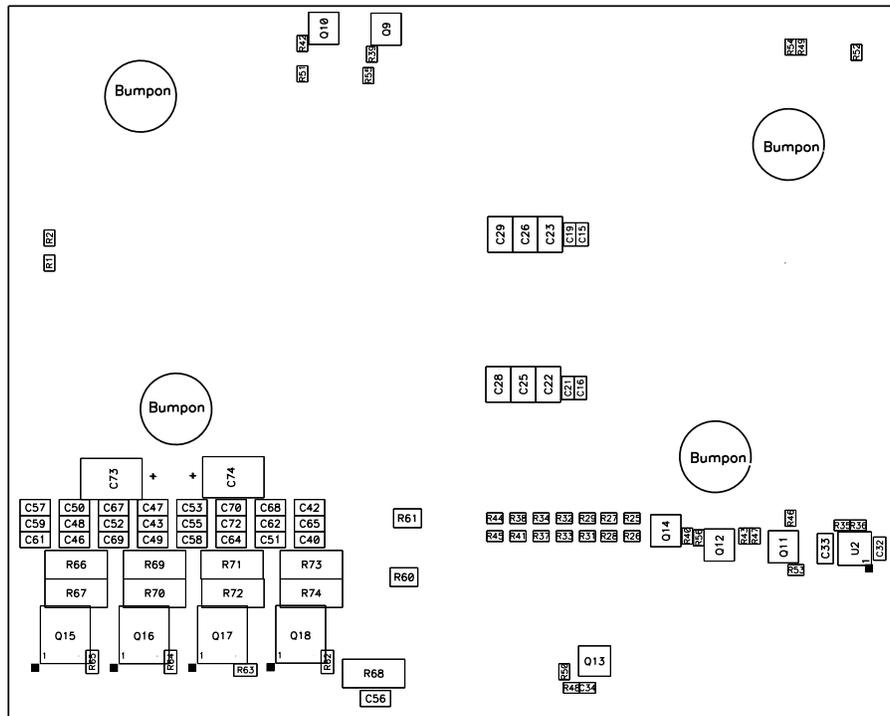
TPS51621EVM-602 Bottom Assembly Drawing, Bottom View
